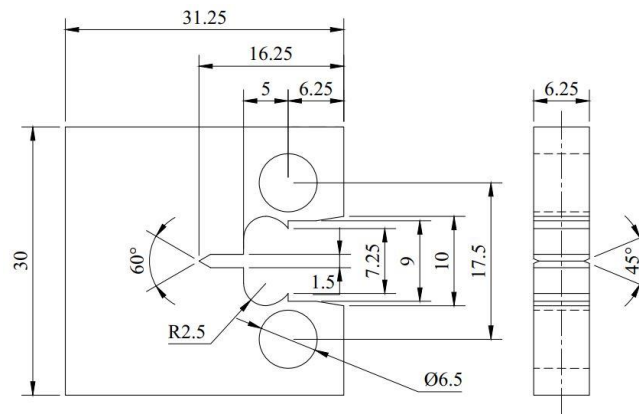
Geometry of CT specimen used for Fracture Testing.
